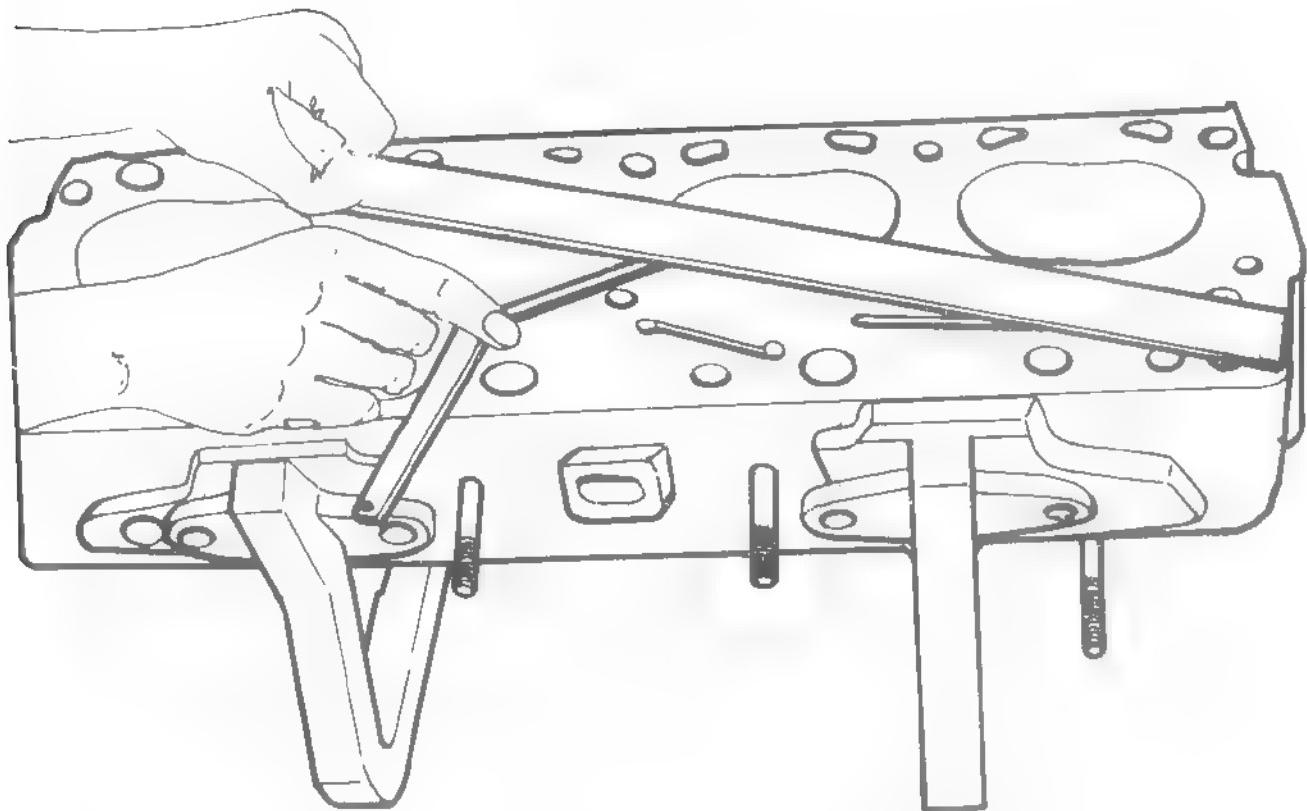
17. CHECKING FLATNESS OF CYLINDER HEAD
